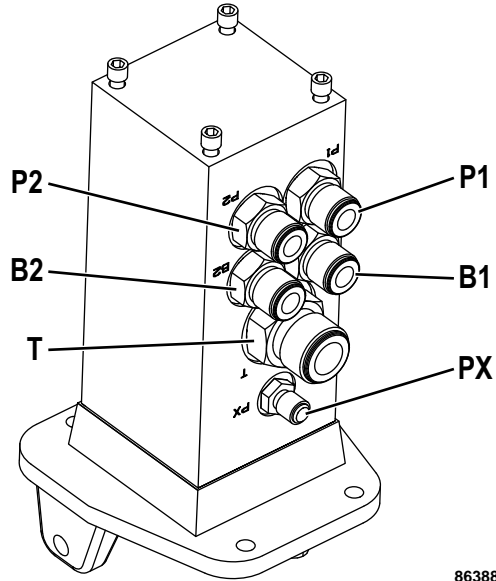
BRAKE VALVE PORT IDENTIFICATION
